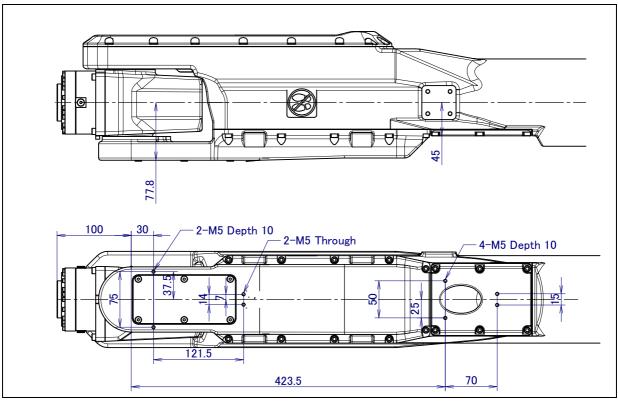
(c) Equipment mounting faces (for the cable clamp) (M-20iA/20MT/35MT)
